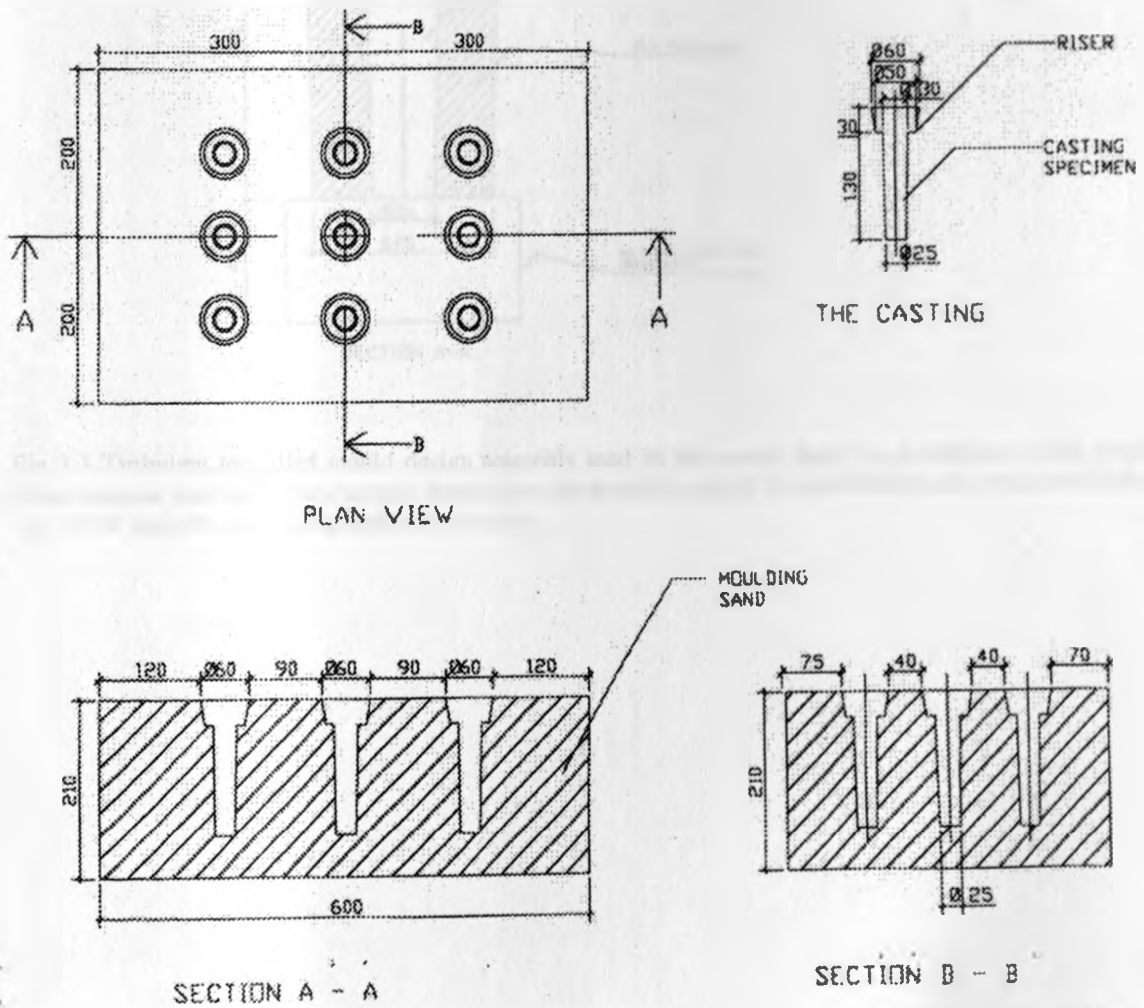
Turbulent top filled mould design assembly used in the current study for green sand casting. All dimensions are in mm
